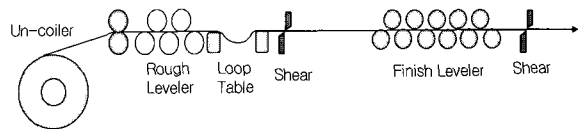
Typical cut-to-length line for leveling and shearing of hot rolled coils
